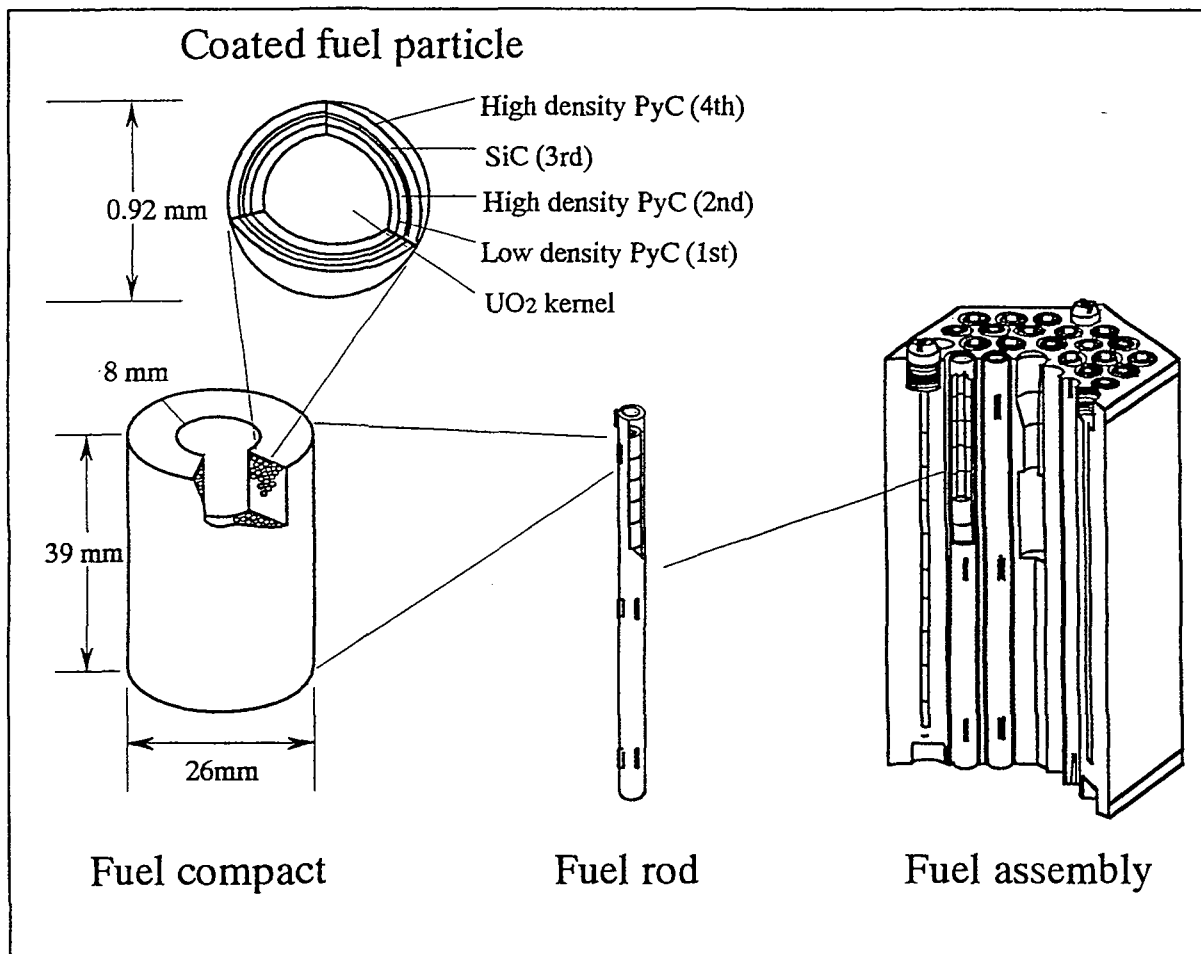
STRUCTURE OF HTTR FUEL ASSEMBLY
